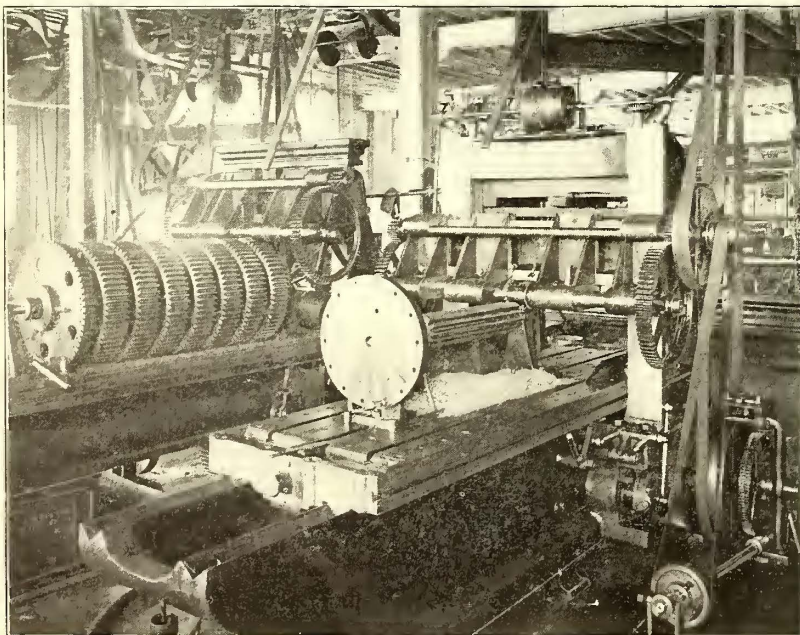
LATHE FOR CUTTING GEARS AND PINIONS
